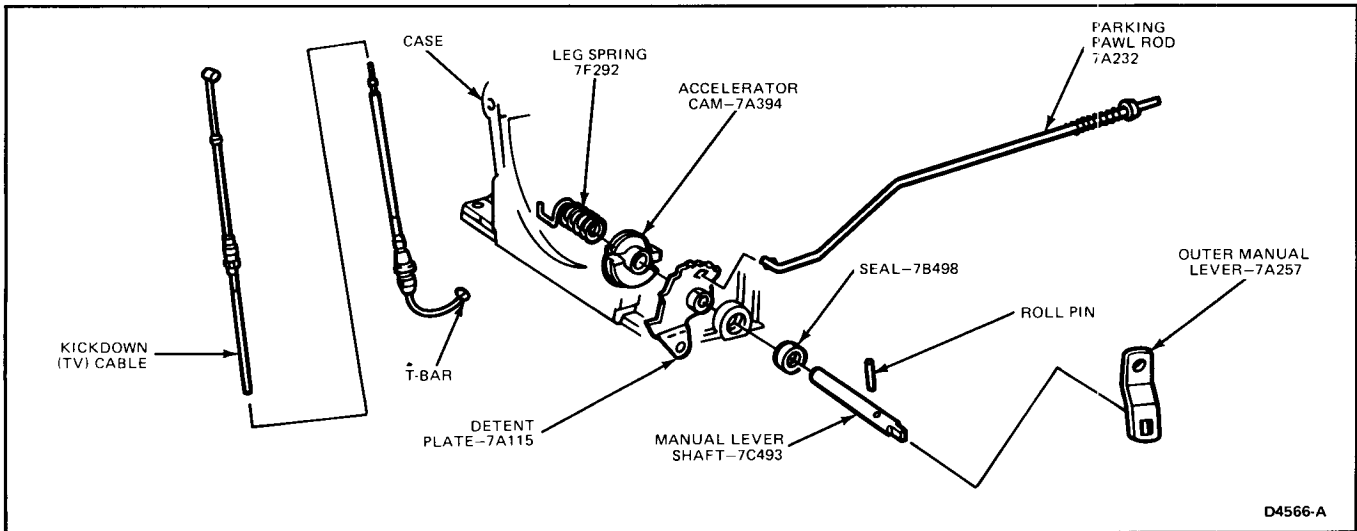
Accelerator Cam, Parking Pawl Rod and Selector Linkage—Exploded View
